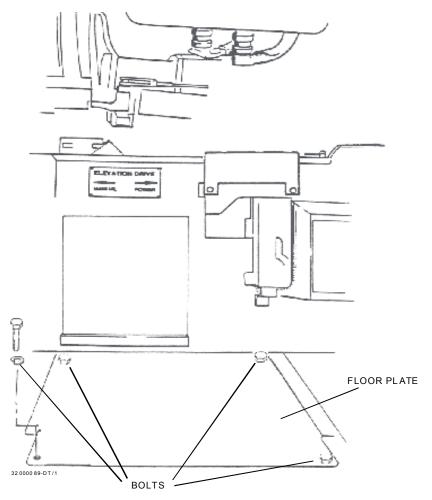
M2/M3 Turret Diagnostic Test Panel Access.
